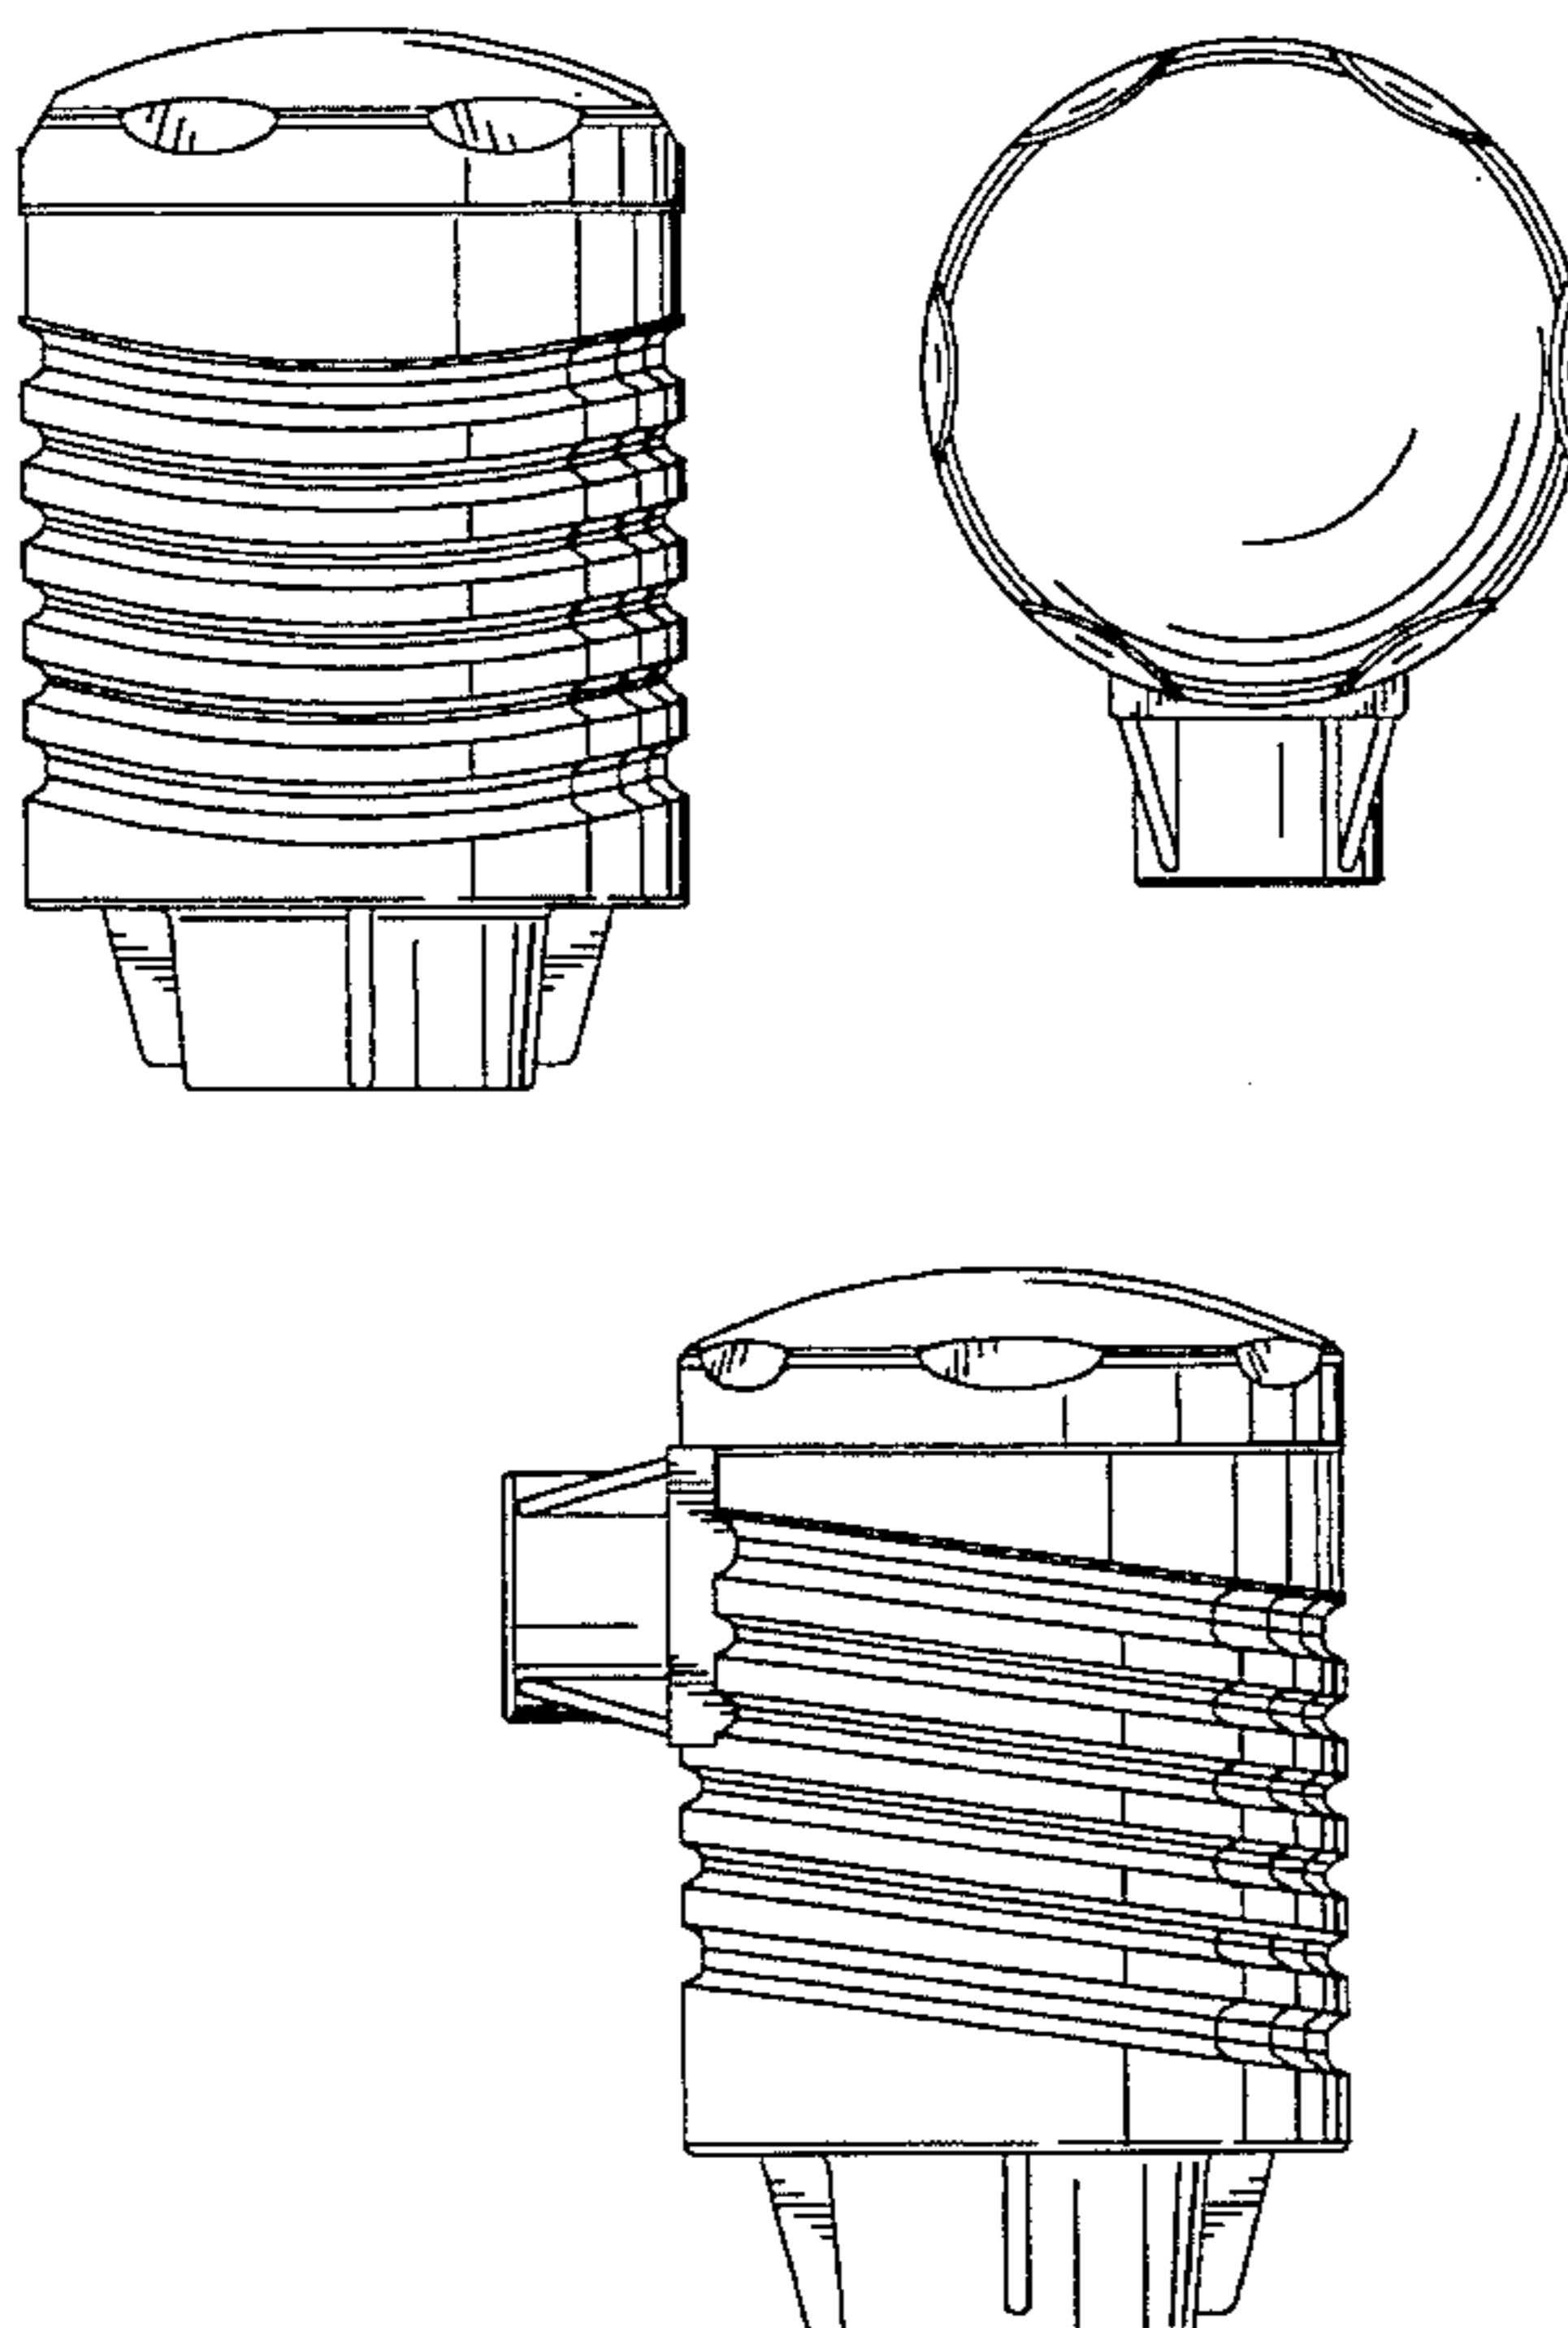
is a bottom plan view of the controller electronics enclosure for liquid handling equipment embodiments of both FIG. 1 and FIG. 6;
